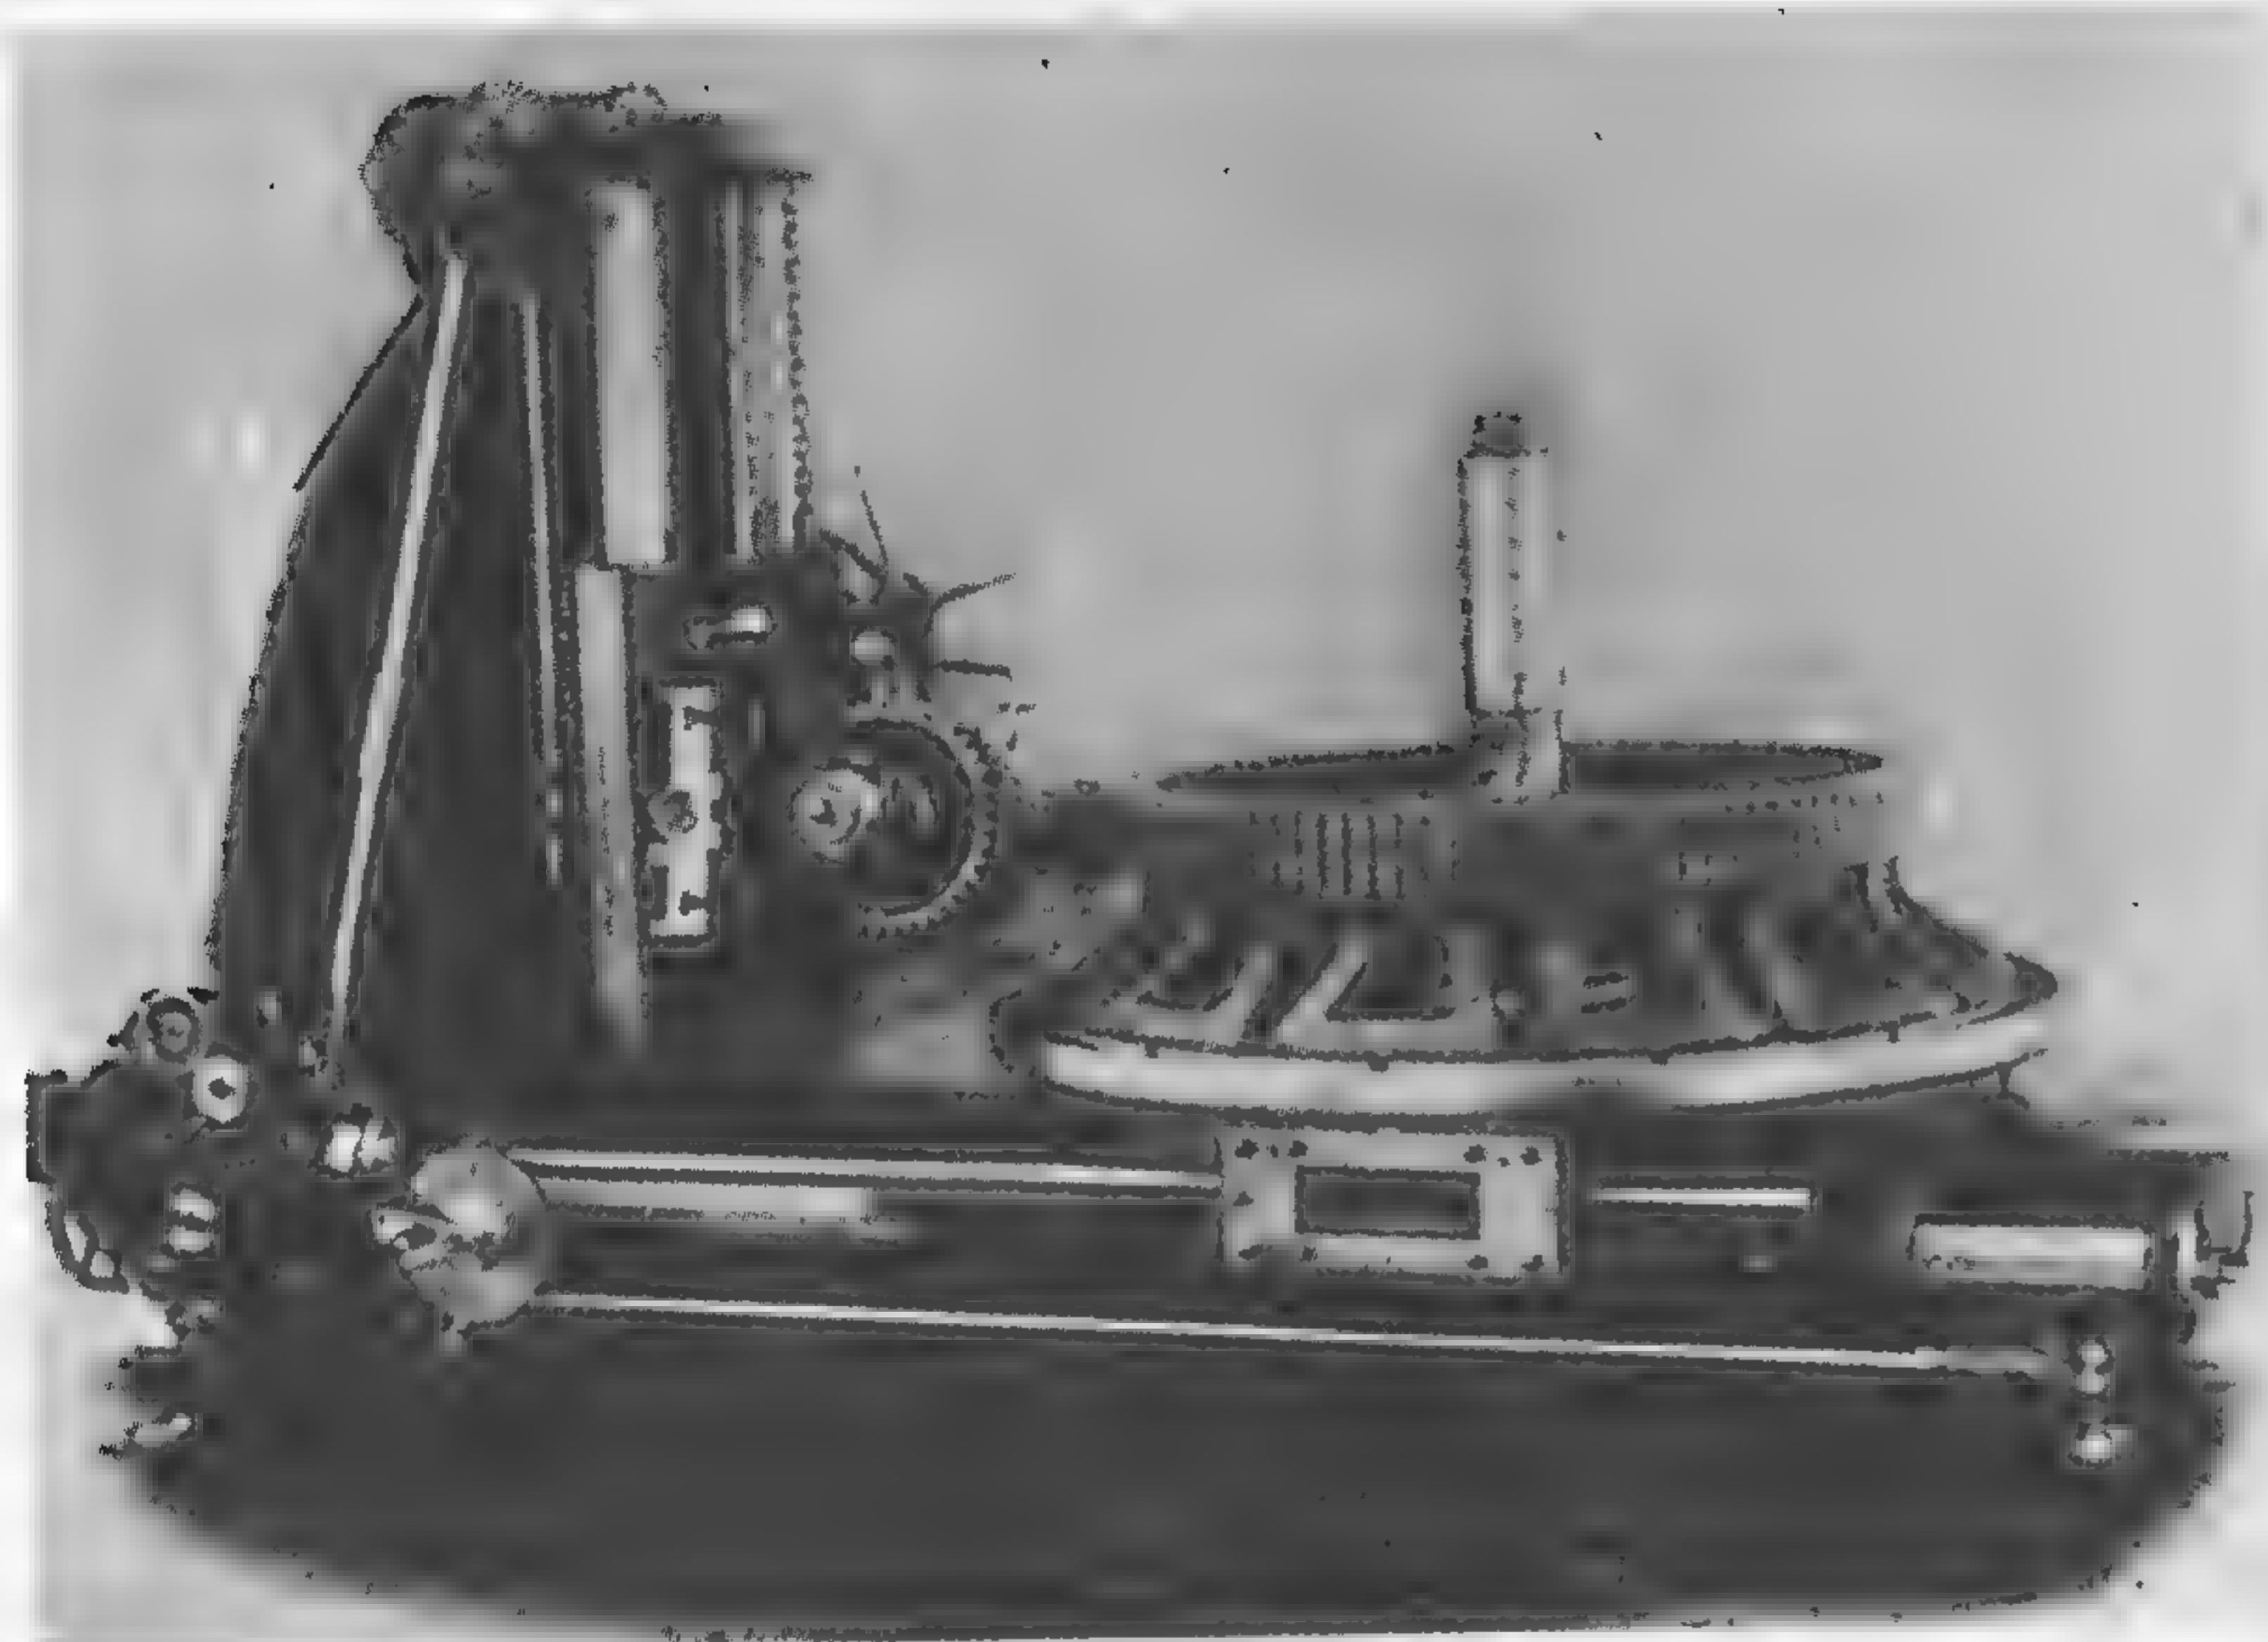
PFAUTER GEAR-HOBGING MACHINE, 1897 (*Inst. Mech. Eng.*)
